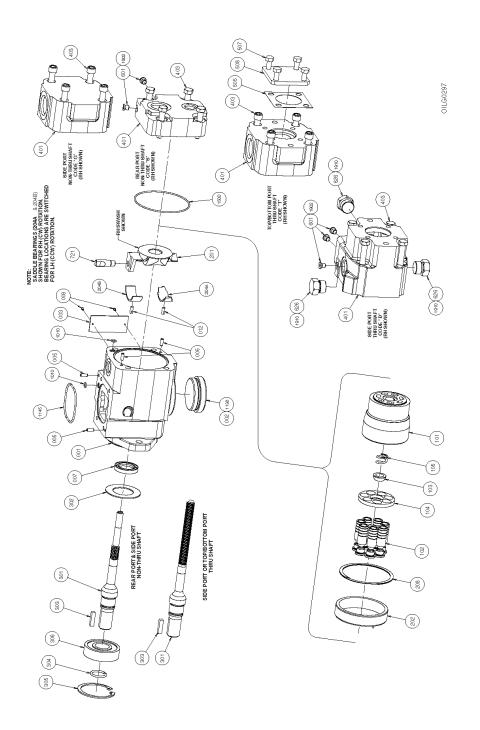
Exploded parts drawing, PVWJ-011/-014/-022 A-Frame (520024-101 sheet 2 of 4).
